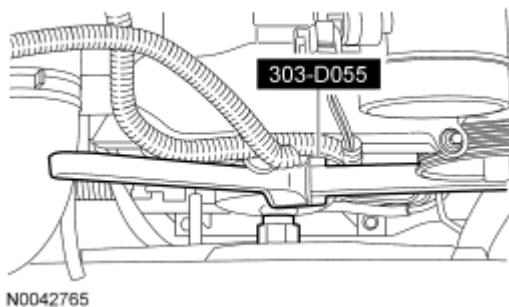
Using Special Tool (303-D055) To Remove Fan Clutch And Blade As An Assembly
